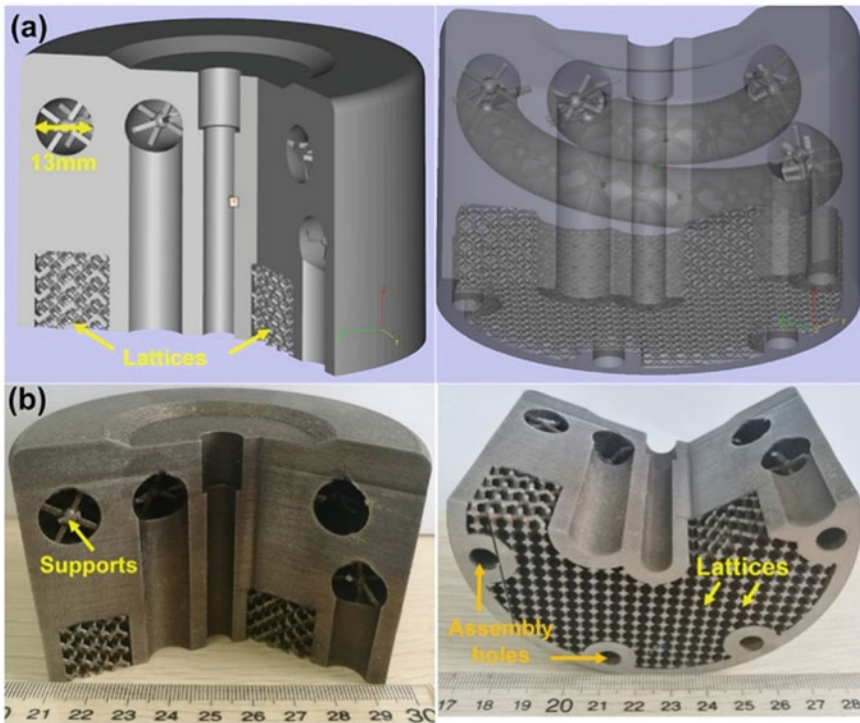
Novel Conformal cooled mould insert: a CAD models of novel conformal cooled mould insert, b the corresponding mould insert processed by PBF-LB/M (Reprinted from Materials and Design, Vol. 196/109147, Chaolin et al. [10], Copyright 2021, with permission from Elsevier)
